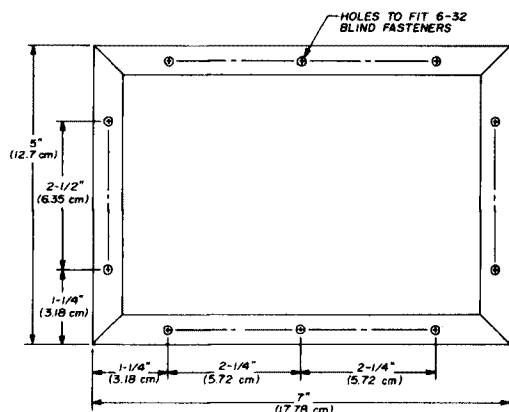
Bottom of the grid box and layout of the cover plate (Bud BPA 1519 or equivalent). The holes in the bottom of the grid box are drilled using the bottom plate as a template.
